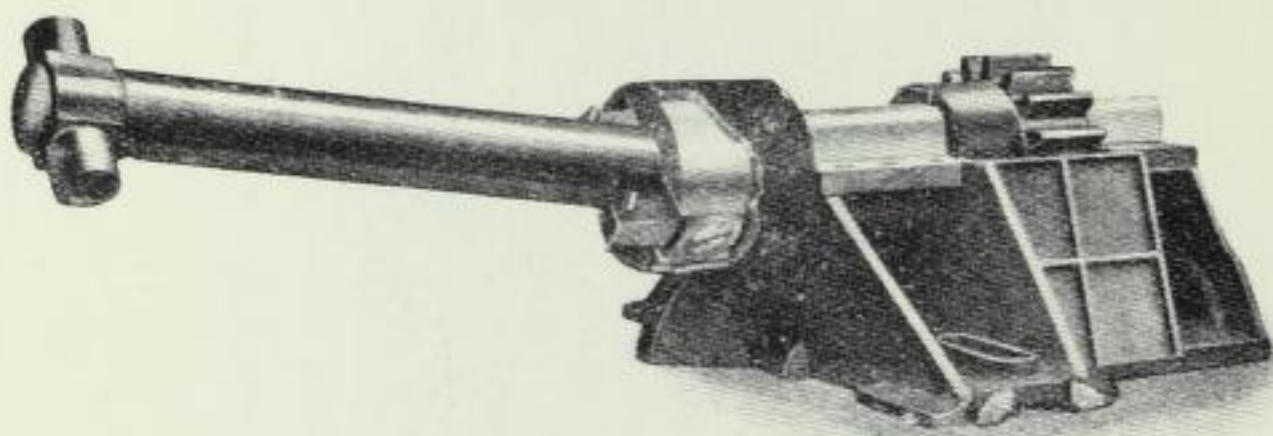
Longitudinal Shaft showing Universal Joint, Baldwin Geared Locomotive.
